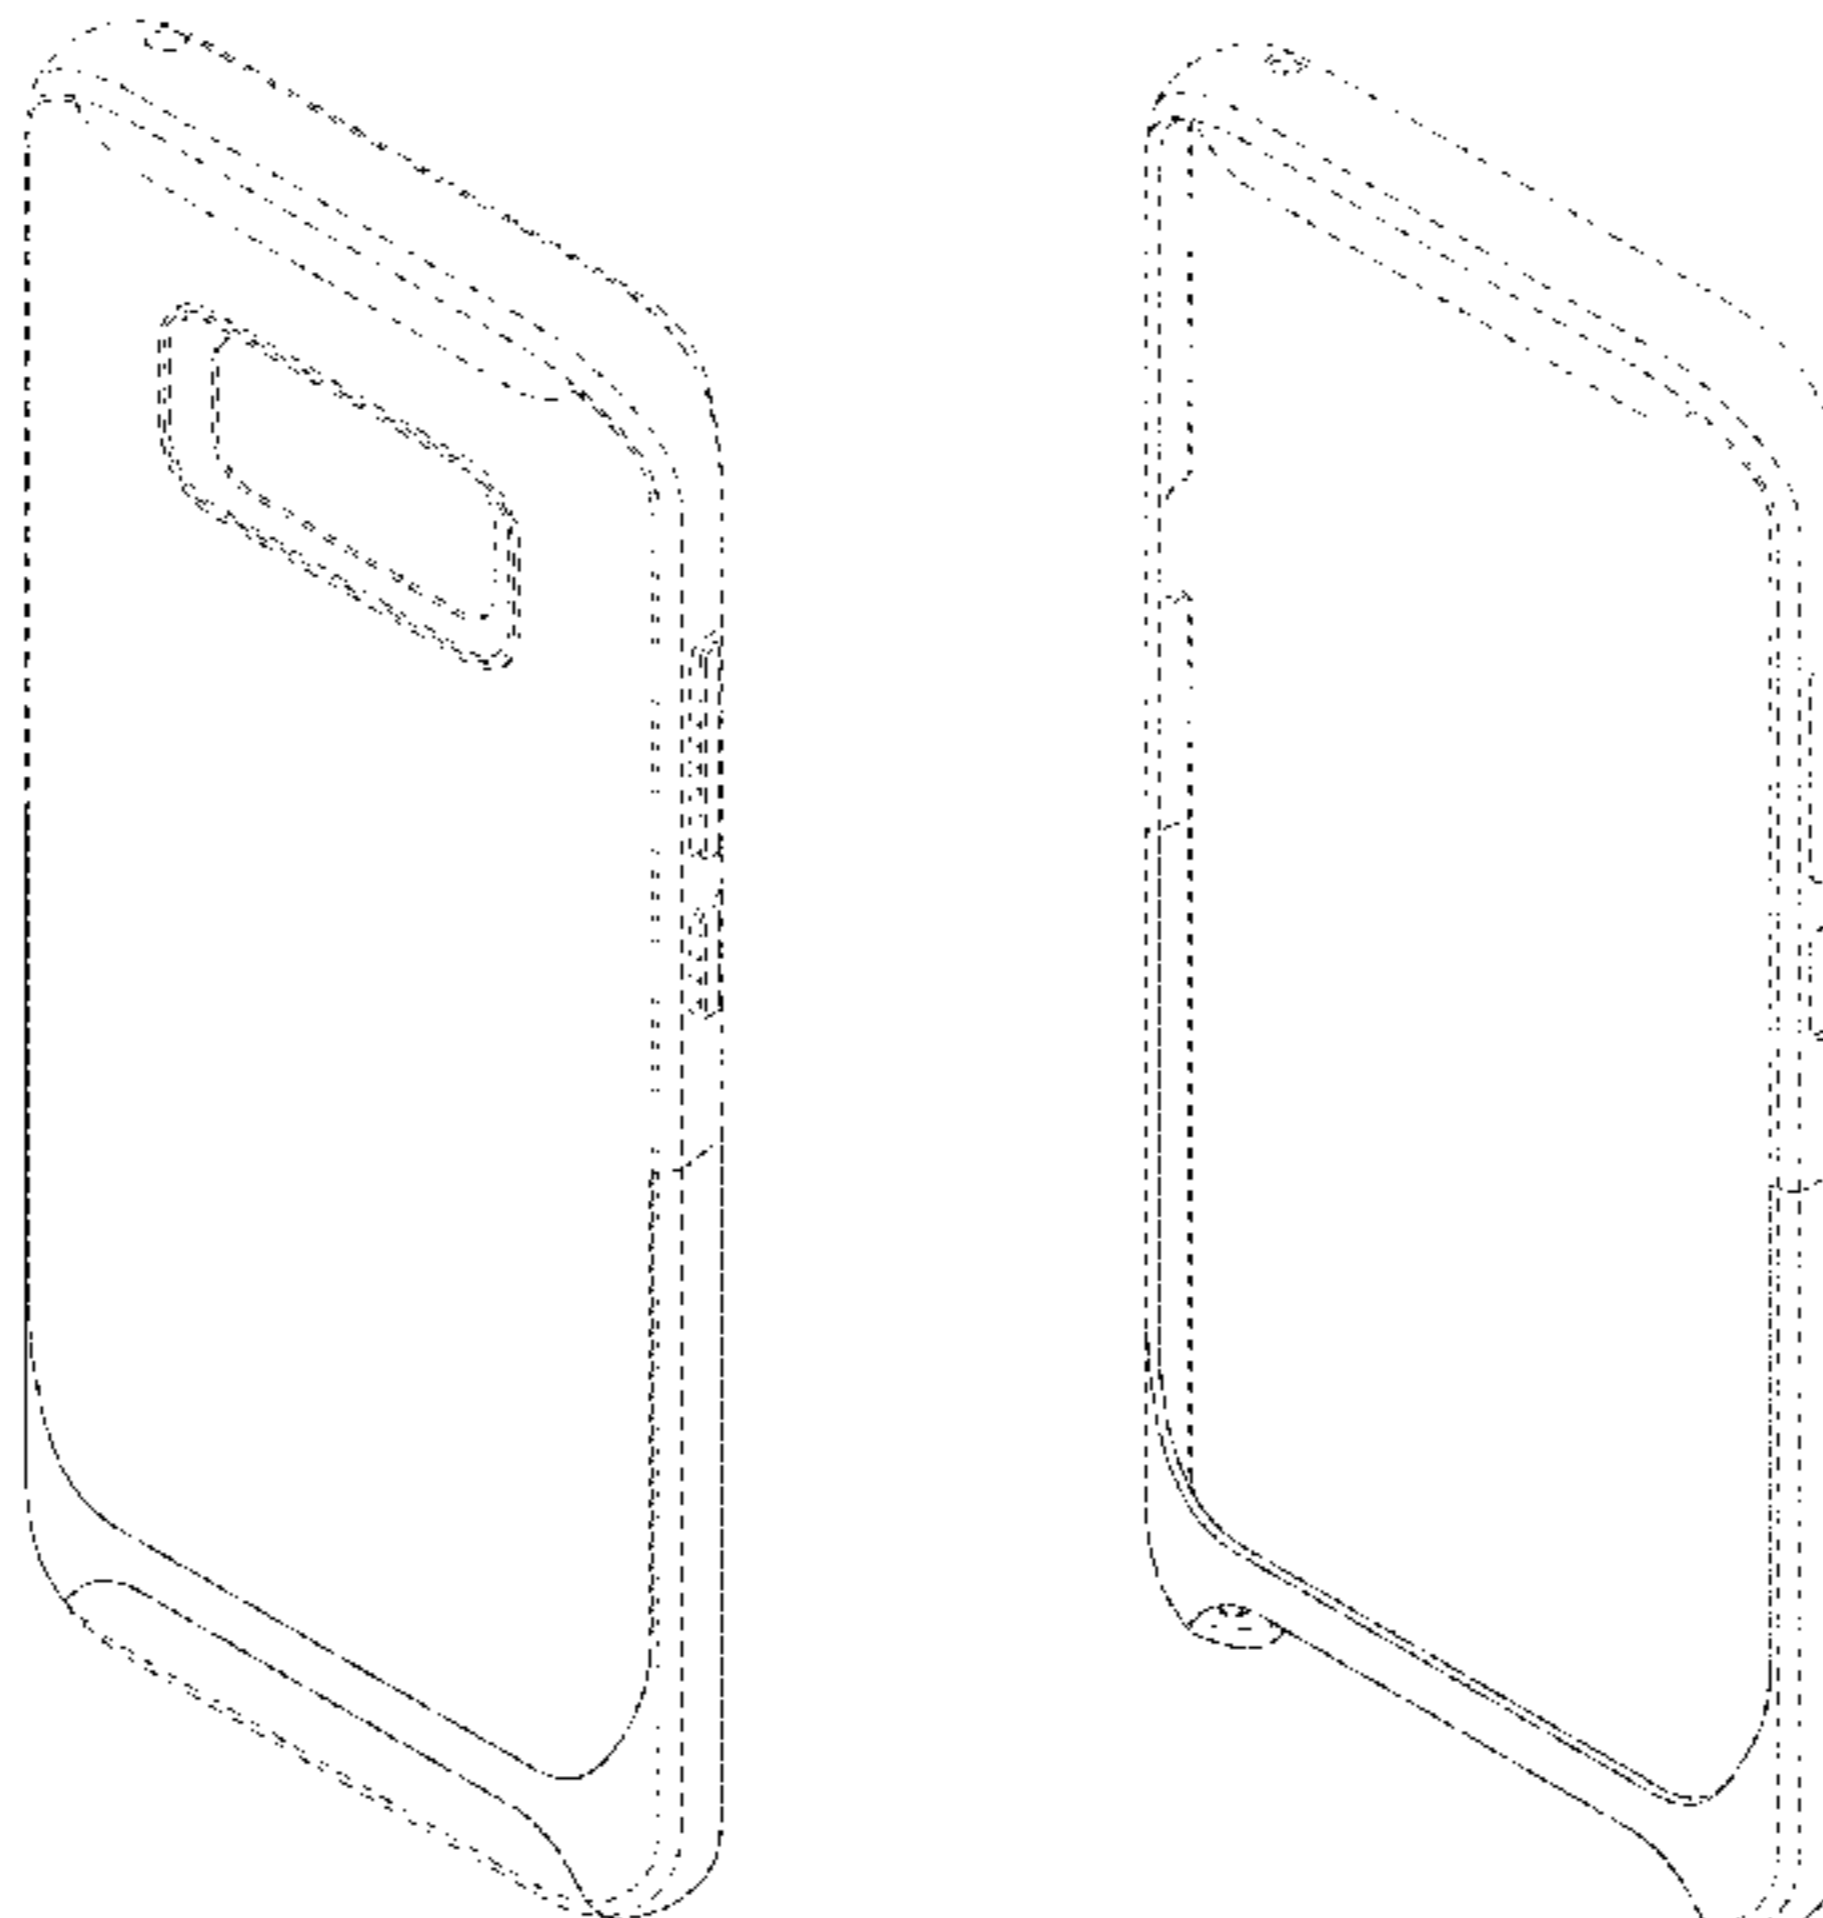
is an exploded front perspective view thereof, showing the inner shell and the outer frame of the case; and,
